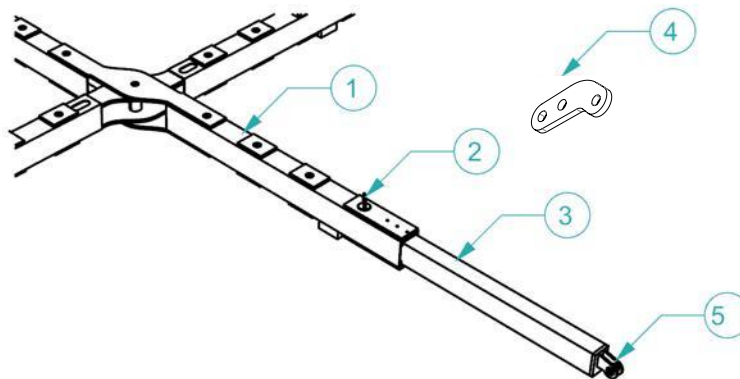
Lift spreader parts: 1 Frame section, 2 Guide pins, 3 End brackets, 4 Links for lifting with chains, 5 Attachment point
